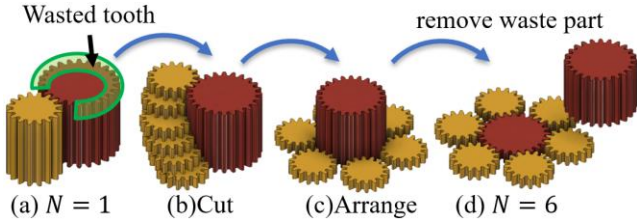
Conceptual explanation of reduction of mass of gears by using redundant motors
